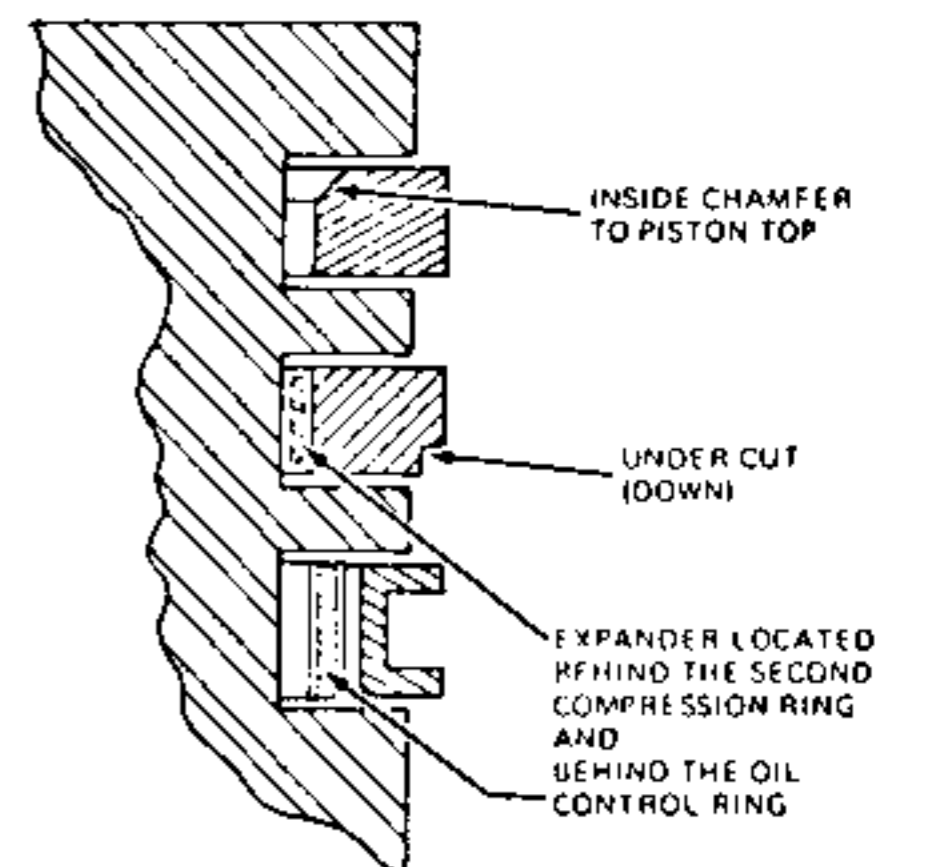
Cross-sectional view showing correct installation of piston rings.
